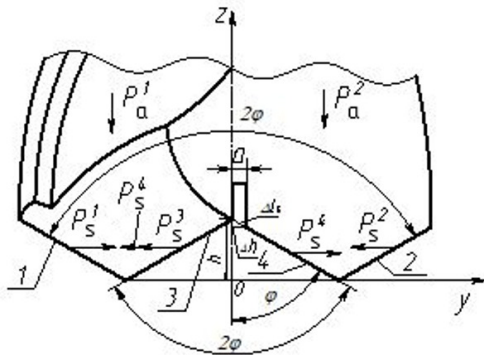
Specific shear forces acting on the projected length of the cutting edge along the direction of the drill axis.
